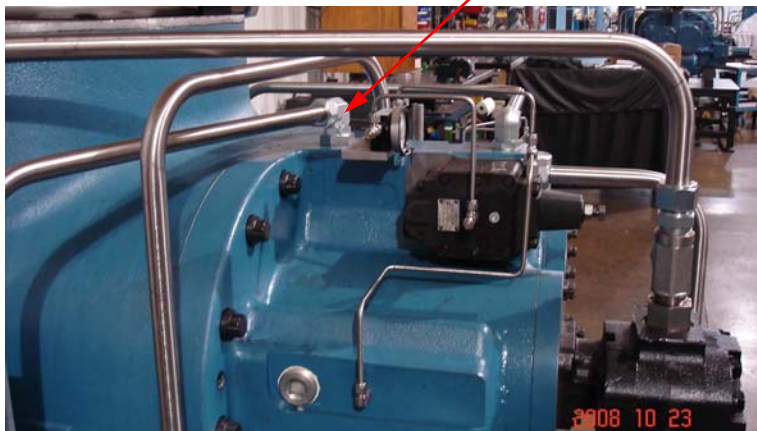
DUPLEX OIL SYSTEM - OIL TUBE CONNECTION AT DISCHARGE
